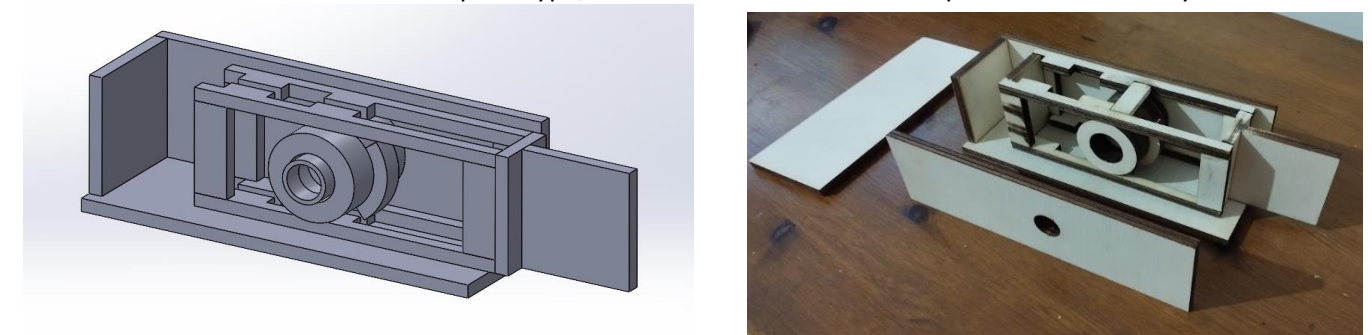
SolidWorks of lock (left) laser-cut prototype lock (right).
